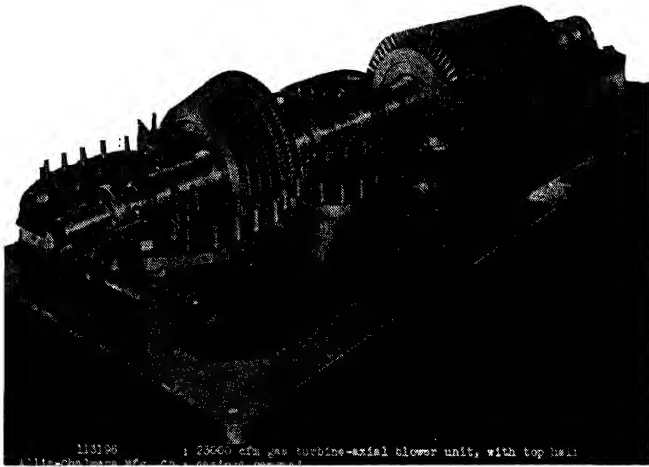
Axial compressor unit for 23,000 cfm gas flow. Top half of casing removed. Turbine unit is in the foreground. (Courtesy Allis Chalmers Mfg. Co.)
